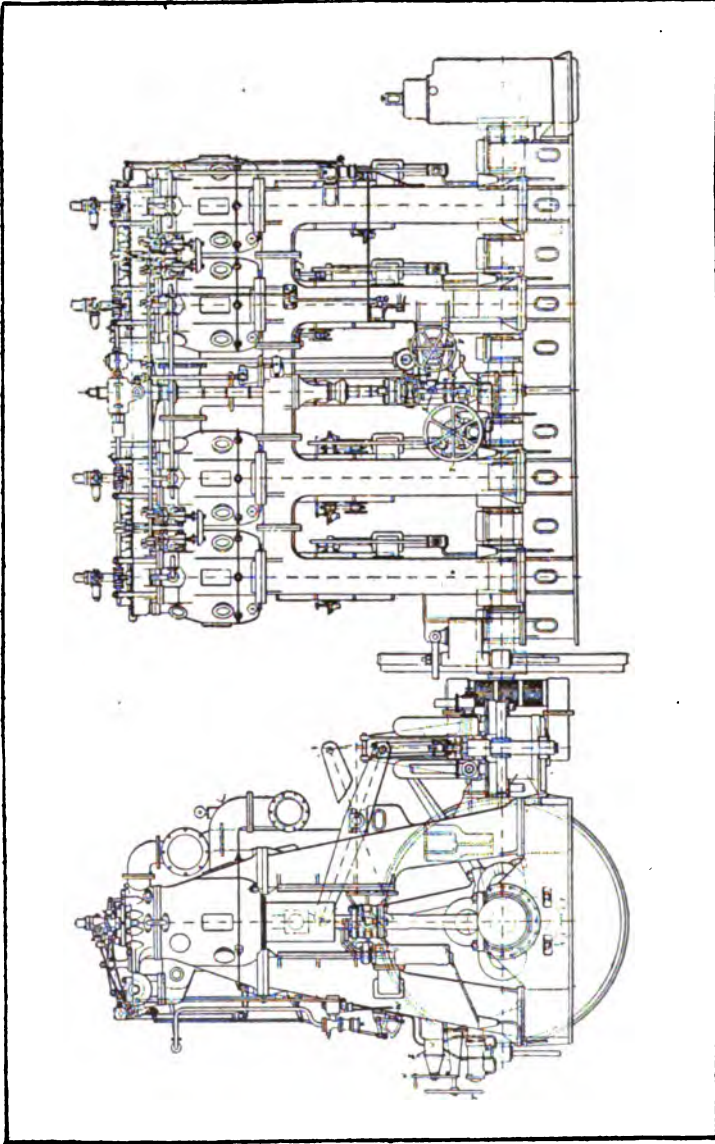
Typical Diesel engine adapted for ship propulsion.
